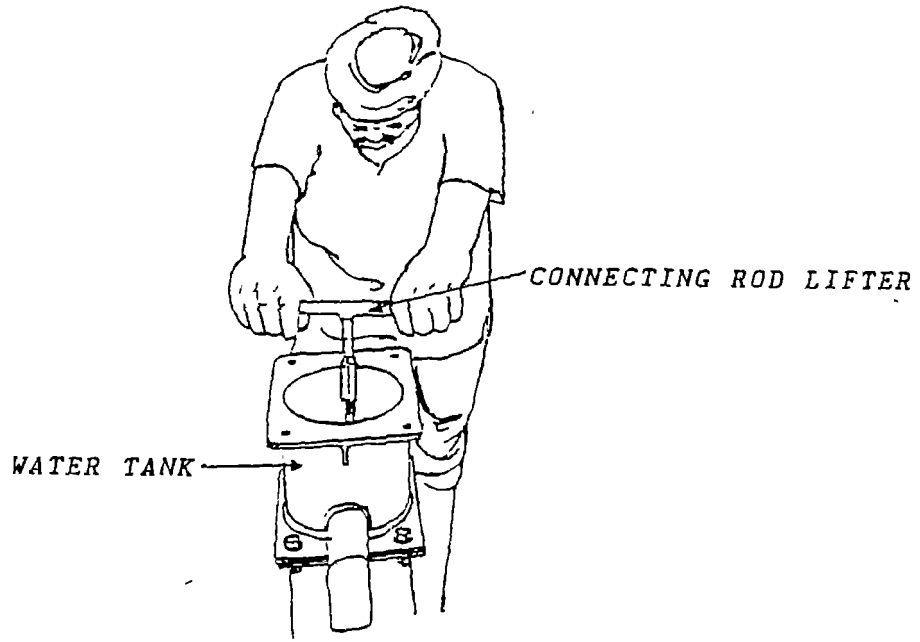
JOIN PLUNGER ASSEMBLY TO CHECK VALVE ASSEMBLY
